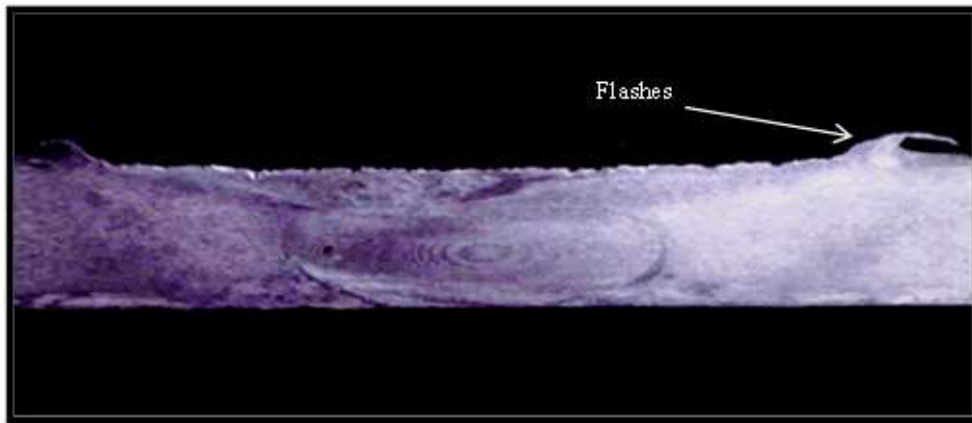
Flashes shown in weld macrostructure.
